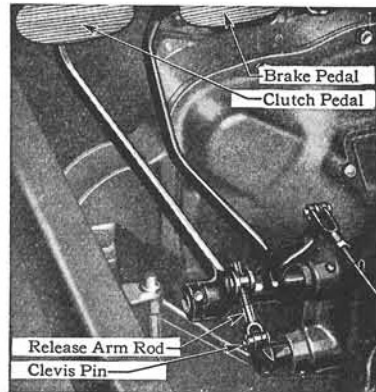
Adjustment of clutch pedal clearance is made by removing the clevis pin and turning the release arm rod. Screwing the rod in decreases the clutch pedal play. Screwing the rod out increases the play. After making adjustment, be sure to replace clevis pin and cotter key.
